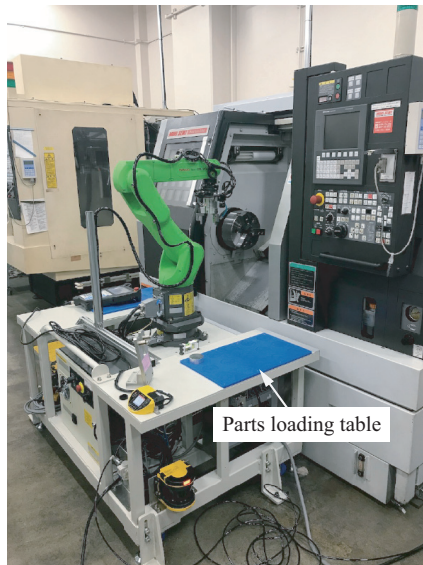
Material-handling manipulator system comprising an automated manufacturing cell by connection with CNC lathe.
